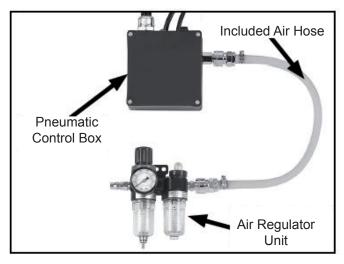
Example of the air regulator unit connected to the pneumatic control box.
